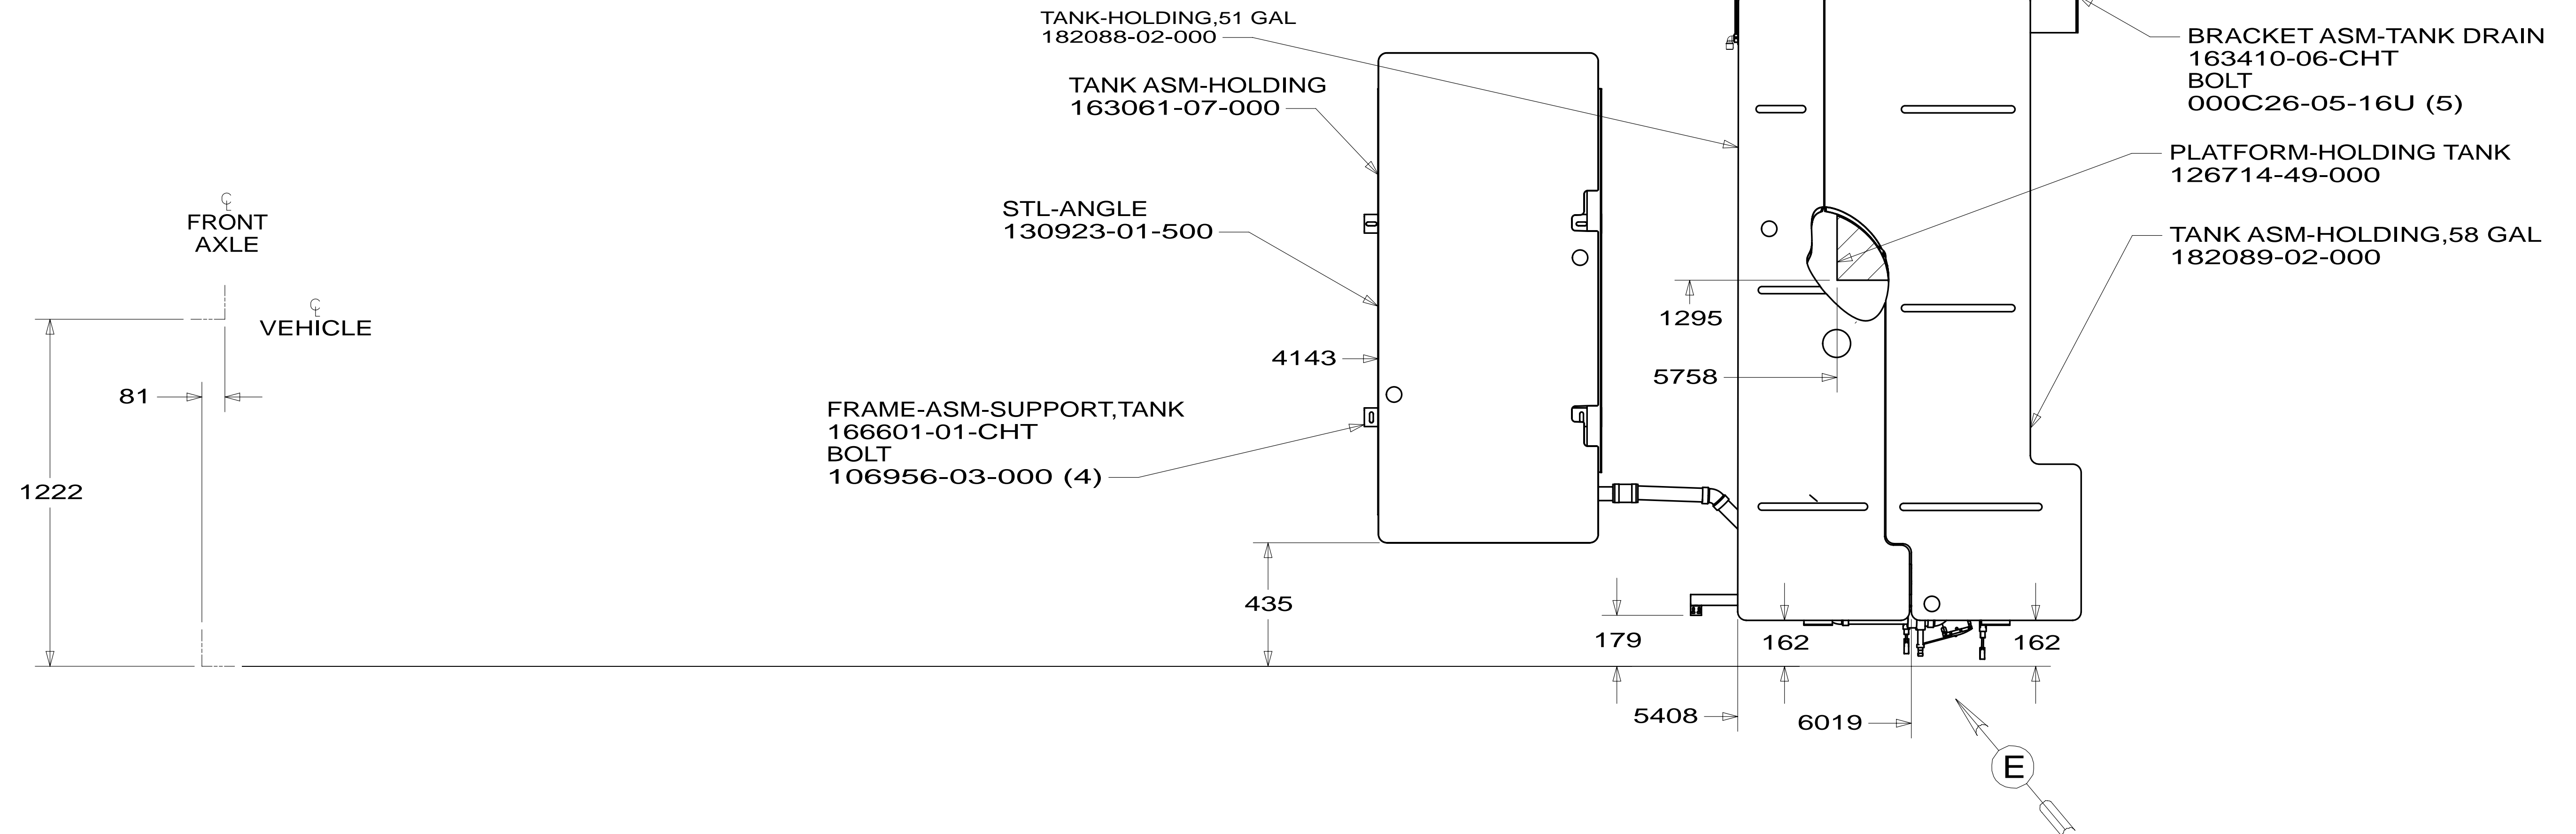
DETAIL C (SHOWN W/OUT CABINETS AND FLOOR)
